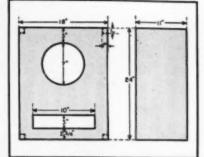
Construction details for building the associated speaker enclosure. Cabinet should be constructed of %" plywood with corners braced with 1" x 1" blocks of wood.
